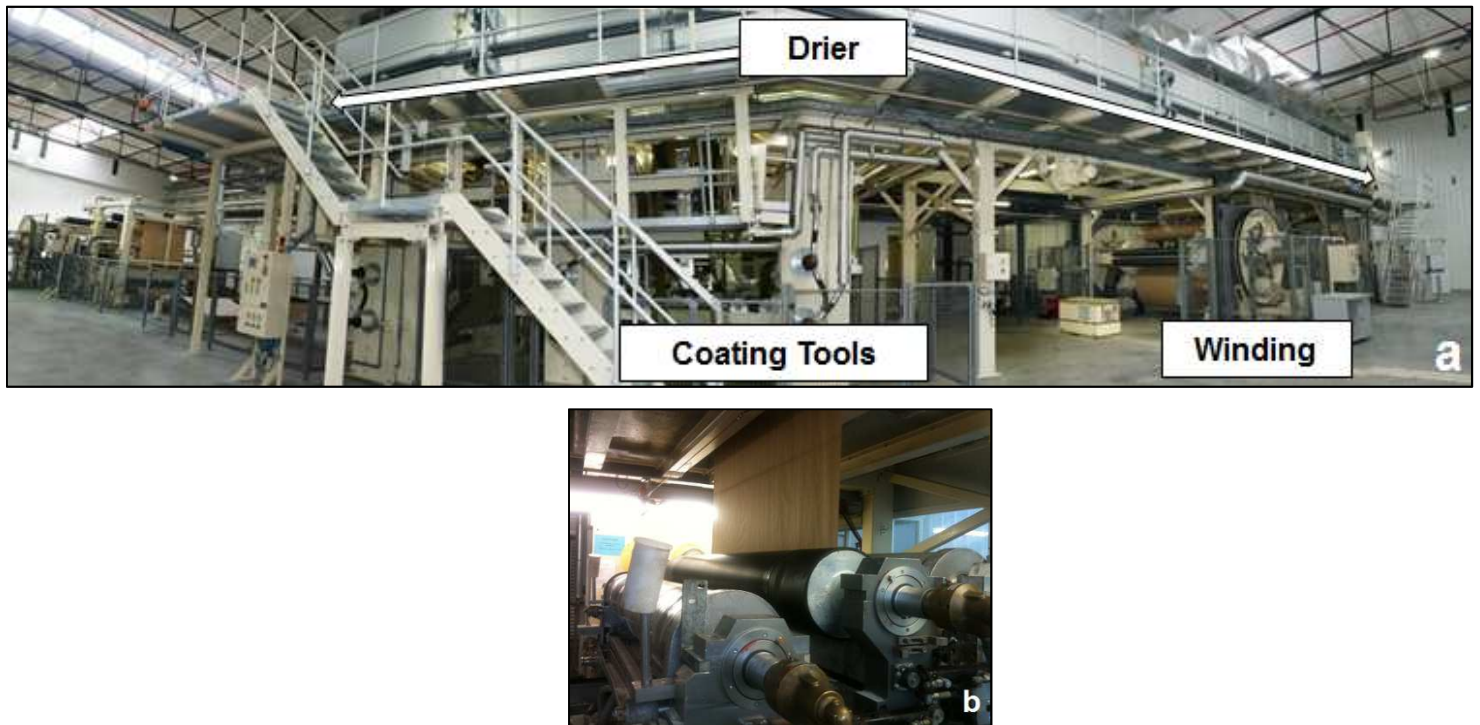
Gascogne Paper industrial paper coating machine (a) and close up on the coating tool (b)
